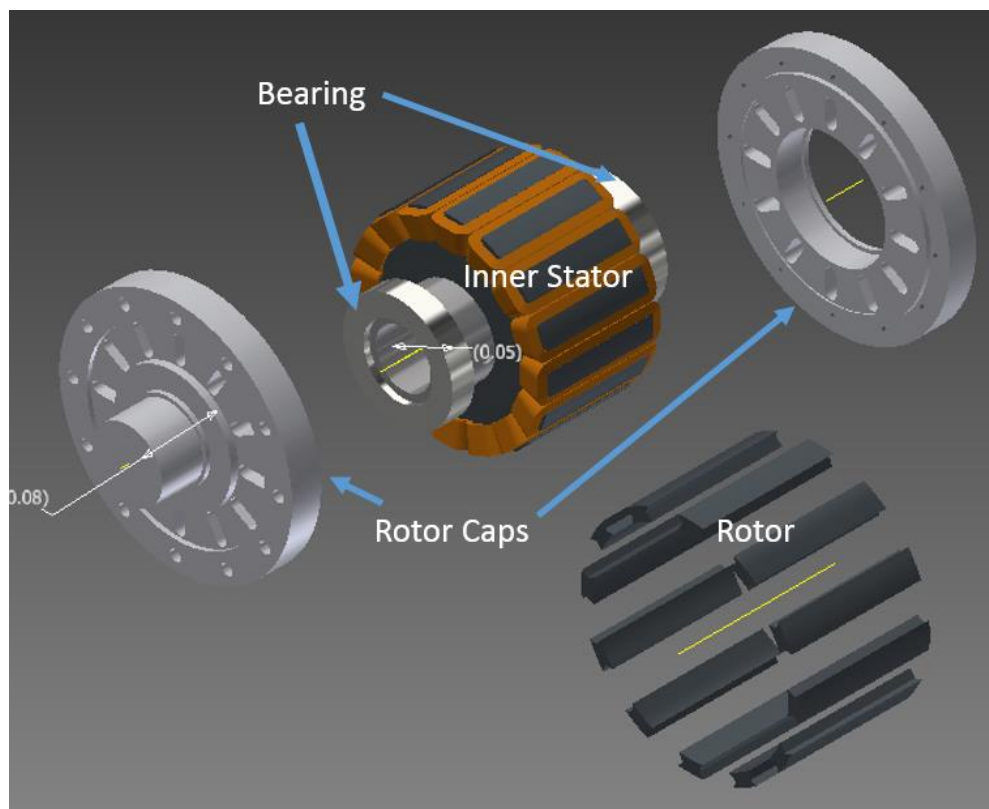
An assembly view of how the rotor mounts onto the inner stator
